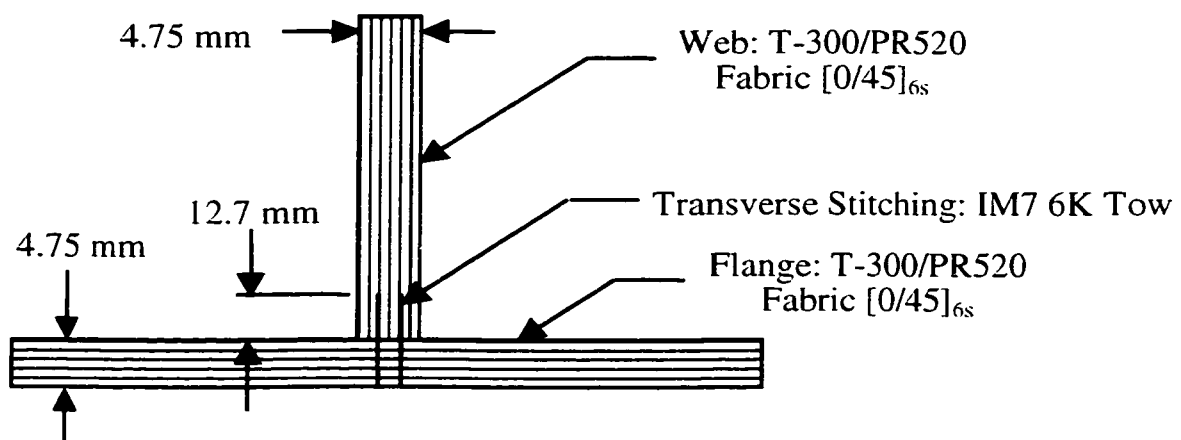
Typical T-Joint Specimen Configuration.
